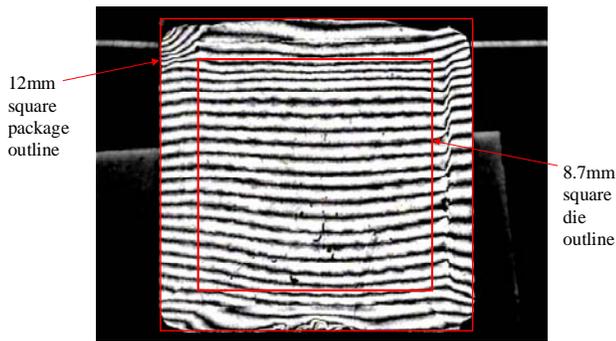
Moiré fringe pattern for the cavity-up enhanced BGA 12mm package. Method reveals a package CTE of 15.5ppm/°C.
